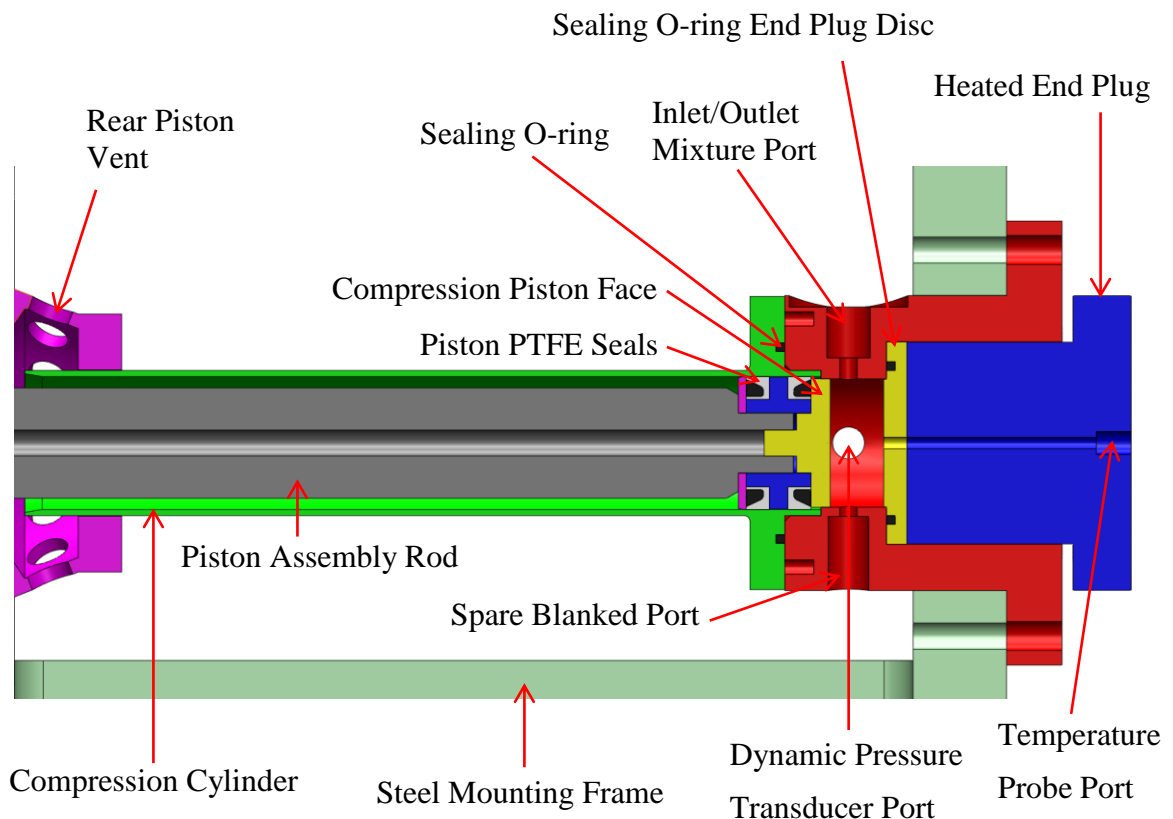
SolidWorks model cross section of section C: Combustion chamber and cylinder (Piston assembly at EOC).
